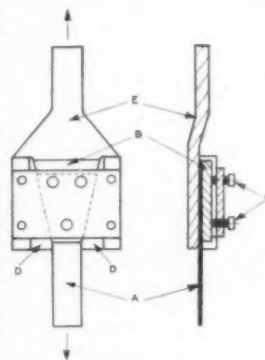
Specimen used by Swift in his wedge-drawing test⁽²⁵⁾
